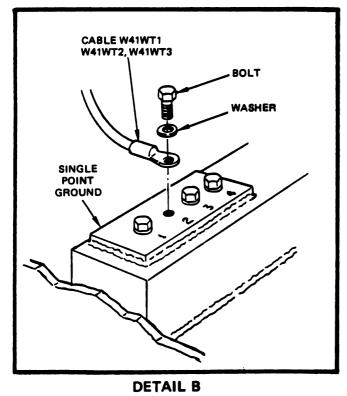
Engine Compartment Interconnecting Cable Assemblies (Sheet 1 of 2)
